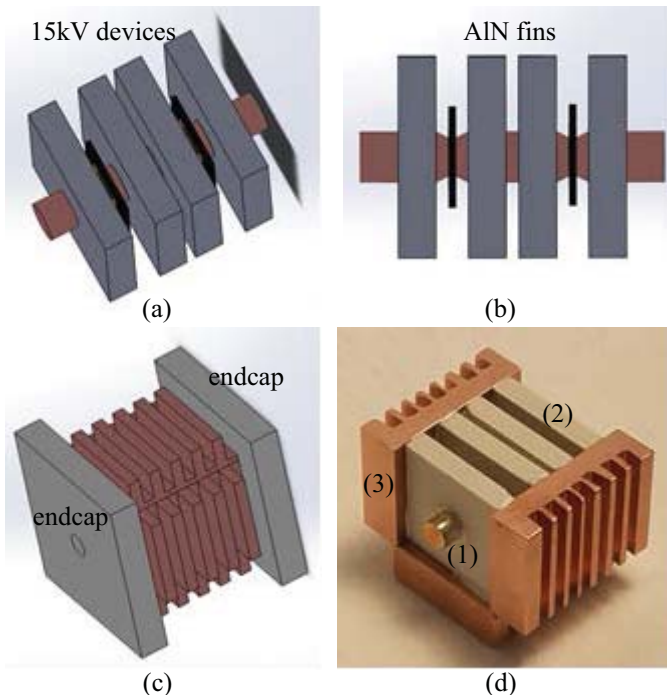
Co-designed high voltage module (30kV) (a) perspective of the interior stack (b) side view of the interior stack (c) completed module with heat sink on all four sides and (d) fabricated module
